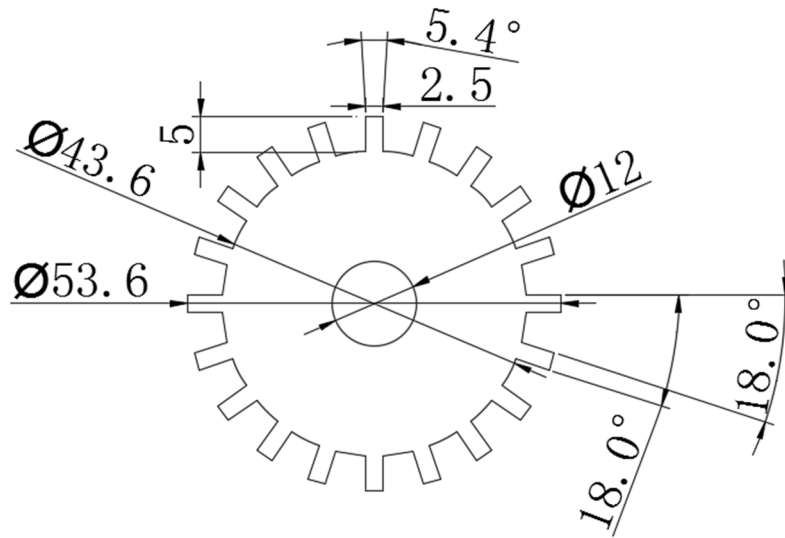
20-pole rotor dimensions for 6/20 FRPM machine.
